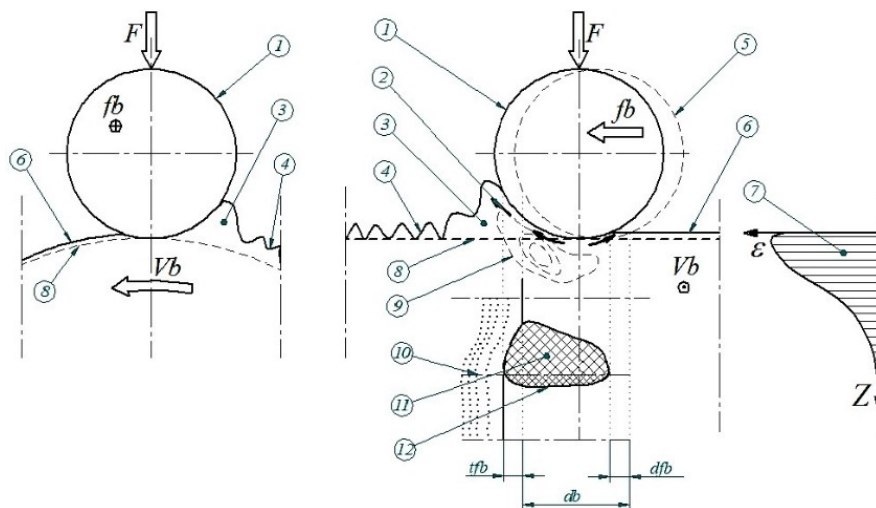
Scheme of strengthening rolling burnishing: 1- burnishing ball, 2- direction of material movement during process, 3- pushing material before burnishing tool (wave), 4- surface before burnishing, 5- preceding position of ball, 6- surface after burnishing, 7- graph of deformation in the surface layer, 8- line of ball sinking, 9- zone of stresses in the surface layer, 10- surface deformation causing by pushing material (wave), 11- zone of plastic and elastic surface deformation, 12- zone of elastic deformation, Vb - burnishing speed, fb - burnishing feed rate, F - burnishing force, db - ball trace, tfb , dfb – displacement of ball trace in next pass.
